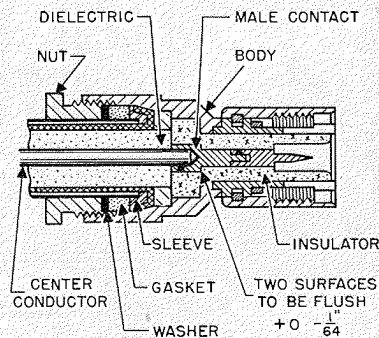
Radio Receiver R-361/GR, R-F Cable Assembly CG-597/U
